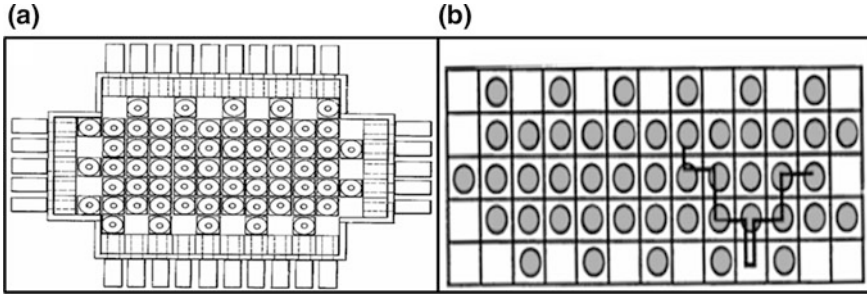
a Schematic view of 3D braiding machine [50]. b Yarn carrier path [166]
